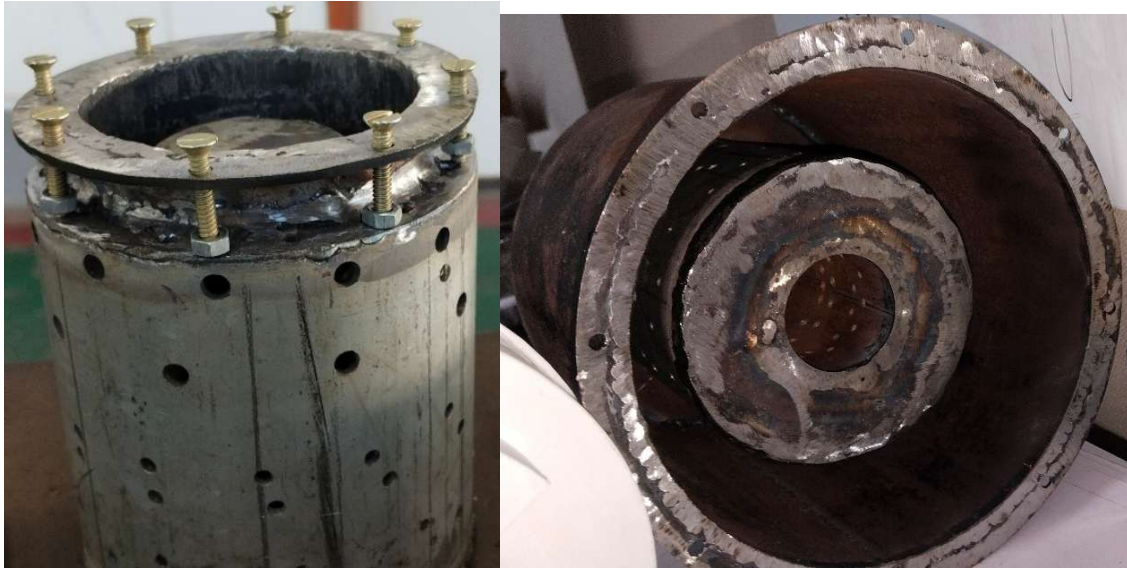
Nutted Joint Assembly Between Combustion Chamber and Outer Casing.
